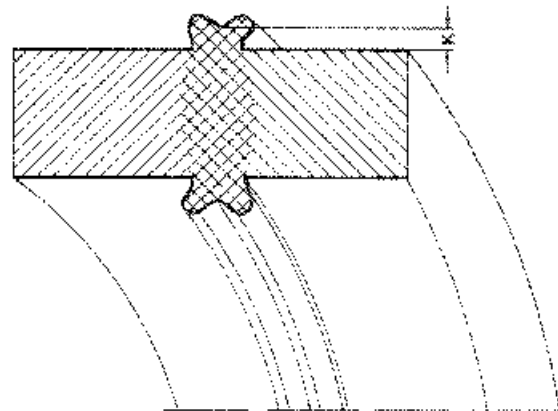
Bead design at heated tool butt welding (principle on example pipe).
